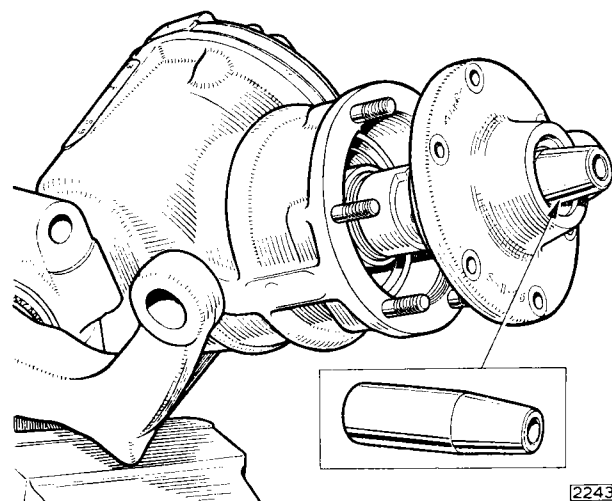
Fitting the top cover with special sleeve (Tool No. 8343)
